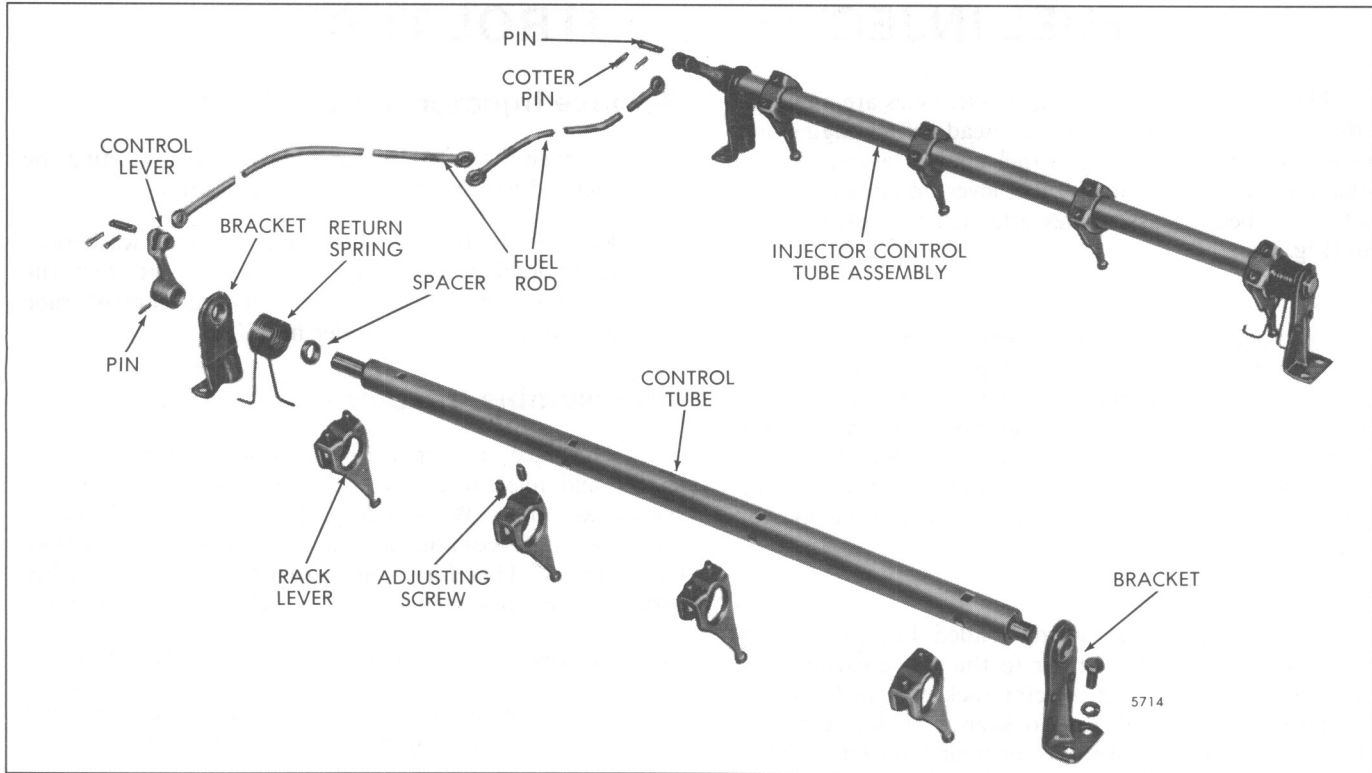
Injector Control Tube Assemblies (Non-Spring Loaded)
